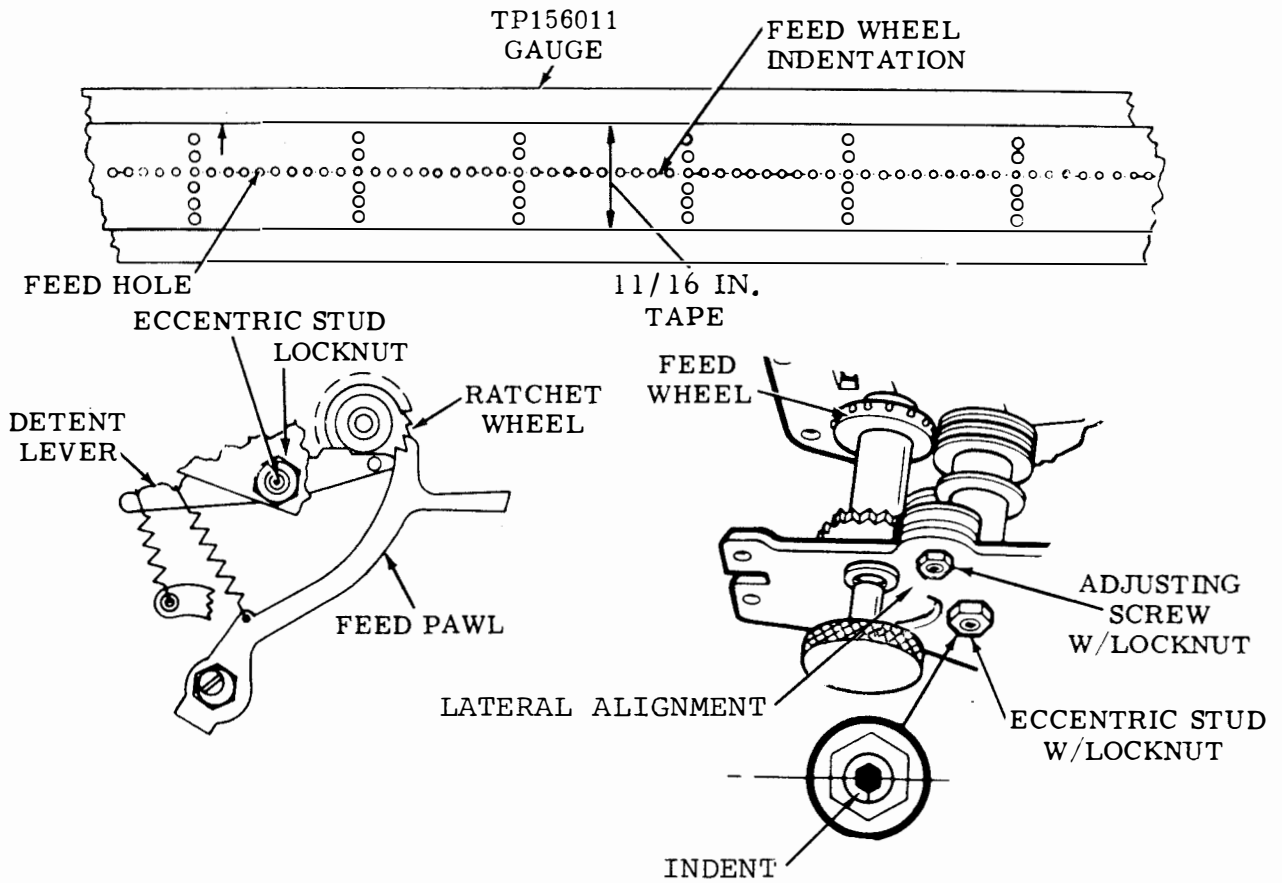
Feed Hole Lateral Alignment and Detent (Fully Perforated Tape With Indentations of Feed Wheel Between Feed Holes)
